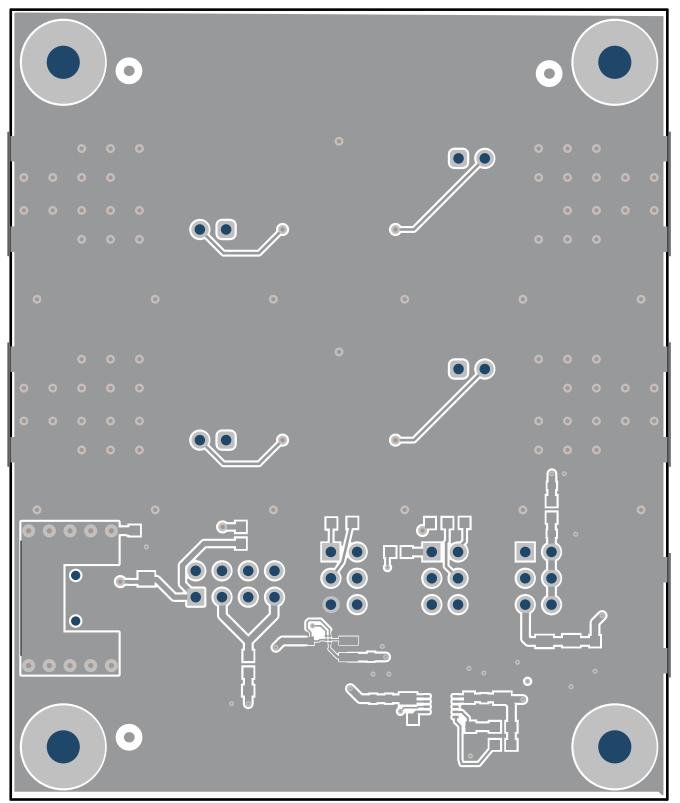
PCB Layout Example From CDC6 EVM - Bottom Layer
